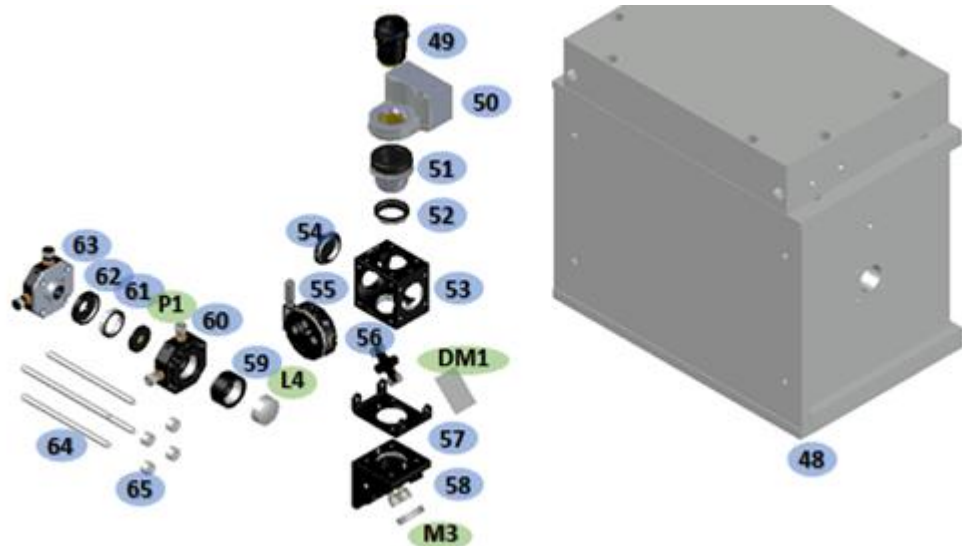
An exploded view of the optical components inside the microscope body, with parts labelled according to Table 2.3.2
